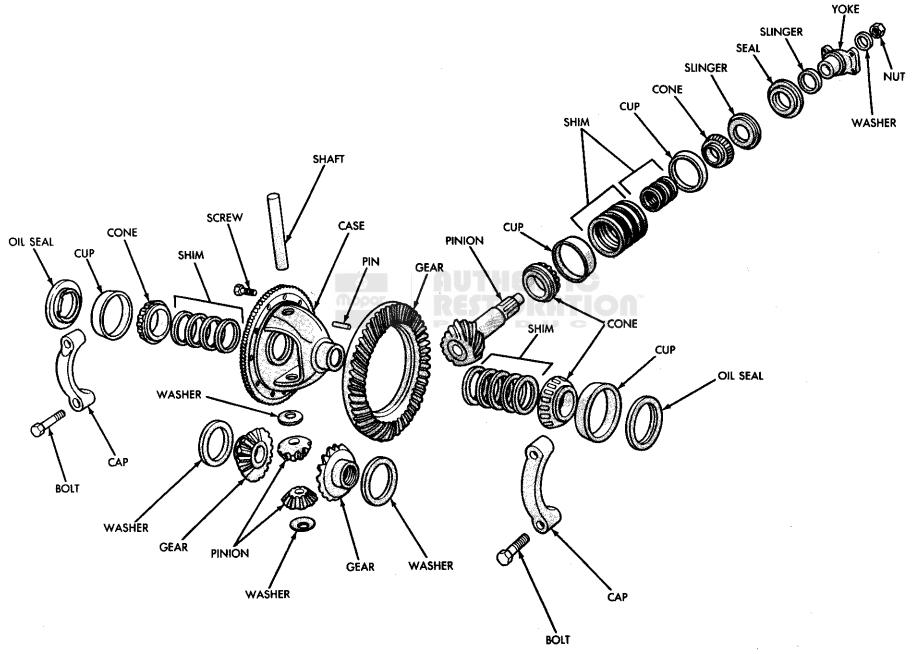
Model 60 & 60M Axle Differential—Exploded View
